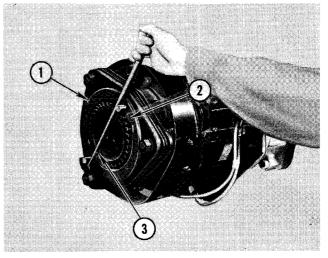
ADJUSTING MOTOR BRAKE 1. Lockbolt 3. Bar
